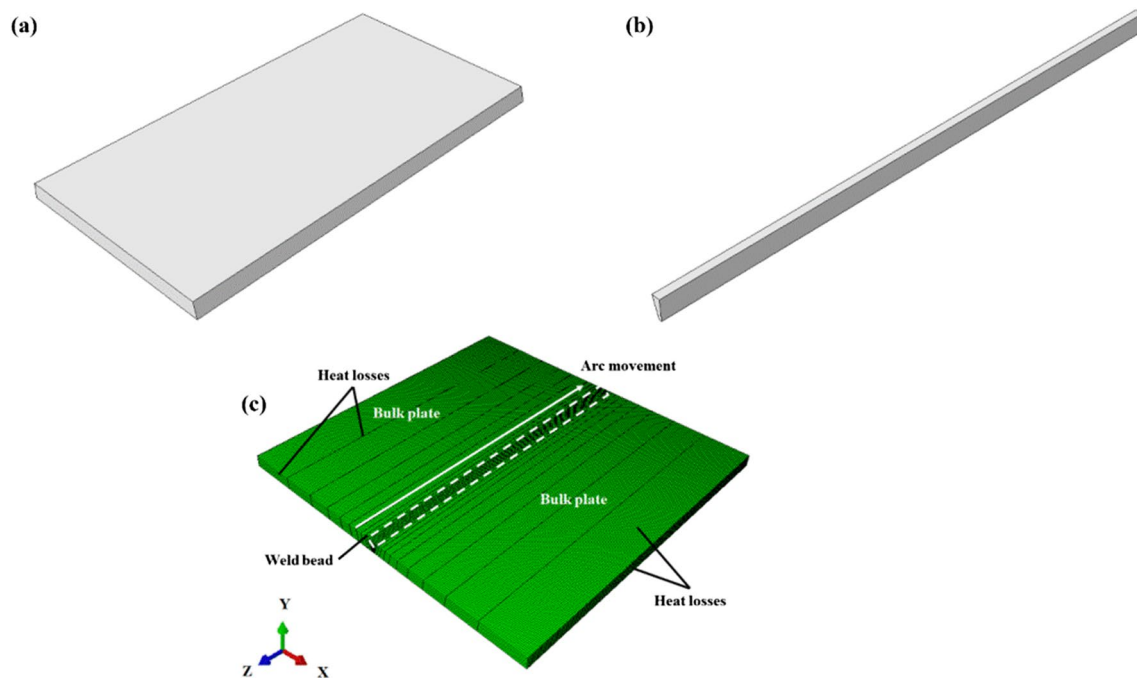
Arc welding model in ABAQUS software a bulk plate, b weld bead, and c complete model for analysis
